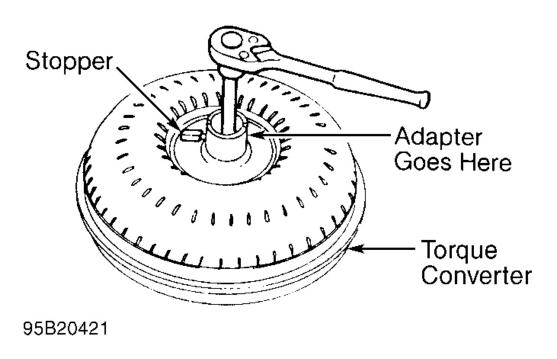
Checking Torque Converter One-Way Clutch Operation Courtesy of ISUZU MOTOR CO.
